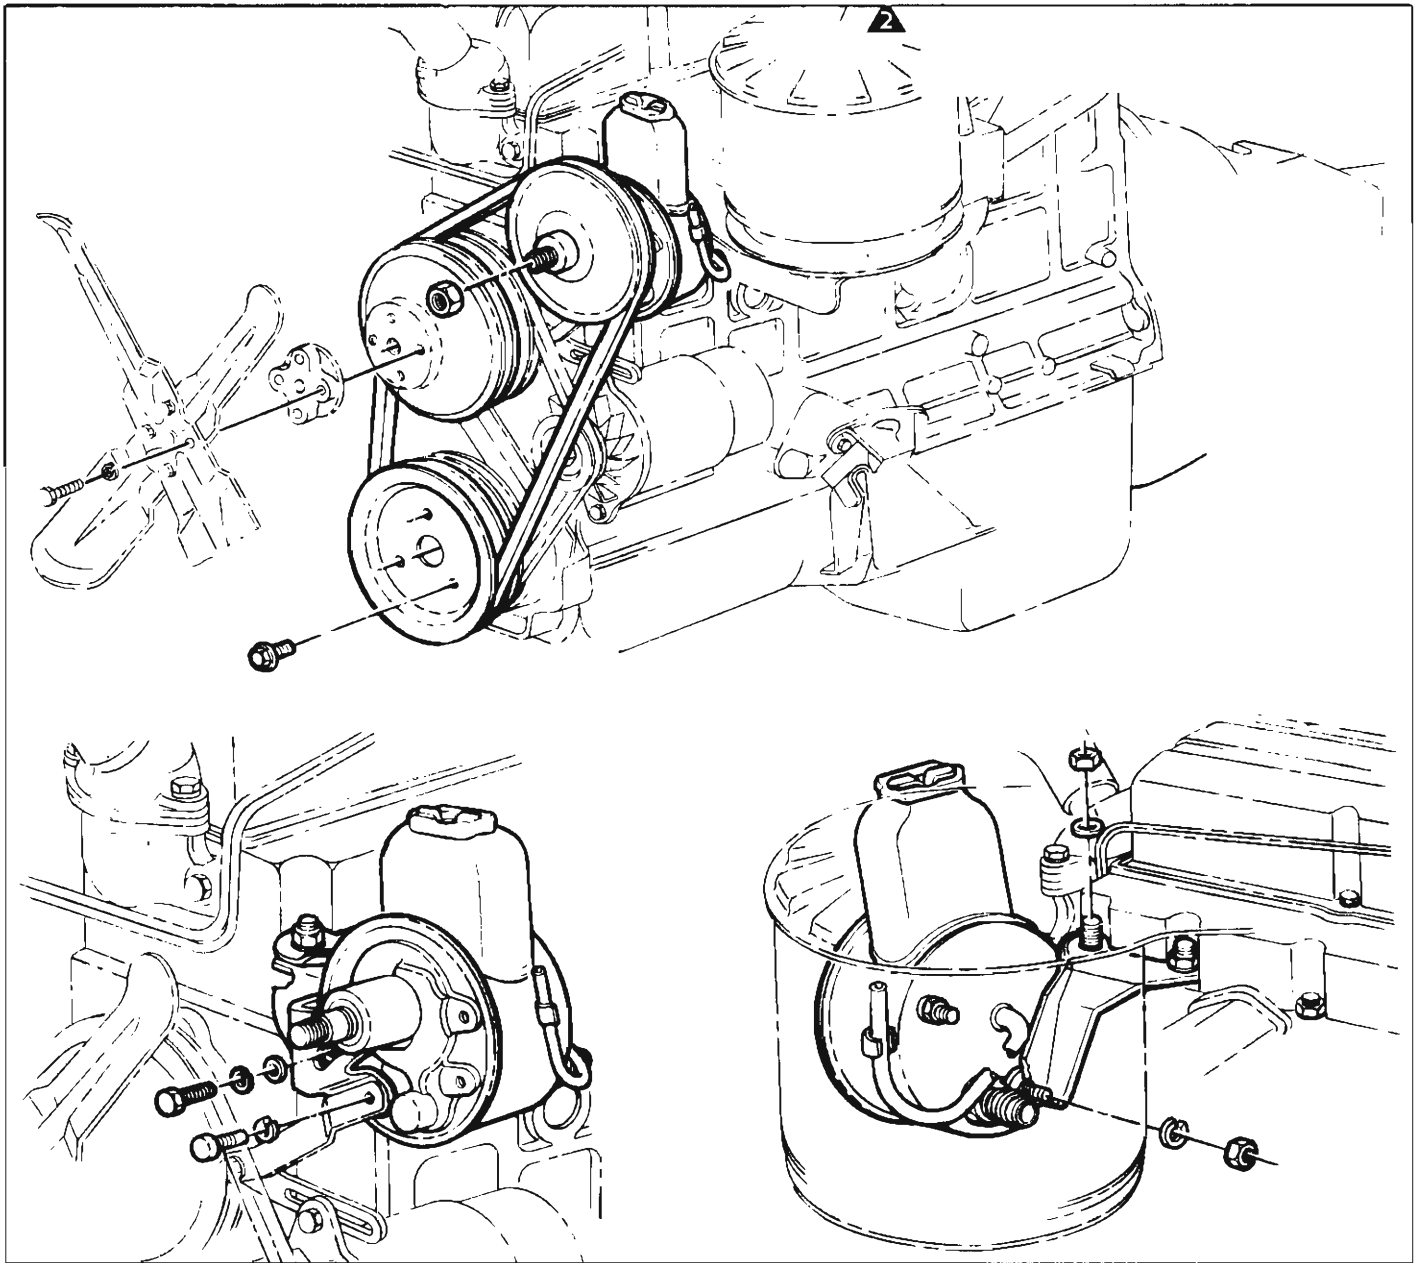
Power Steering Pump Installed—6 Cylinder Engine
